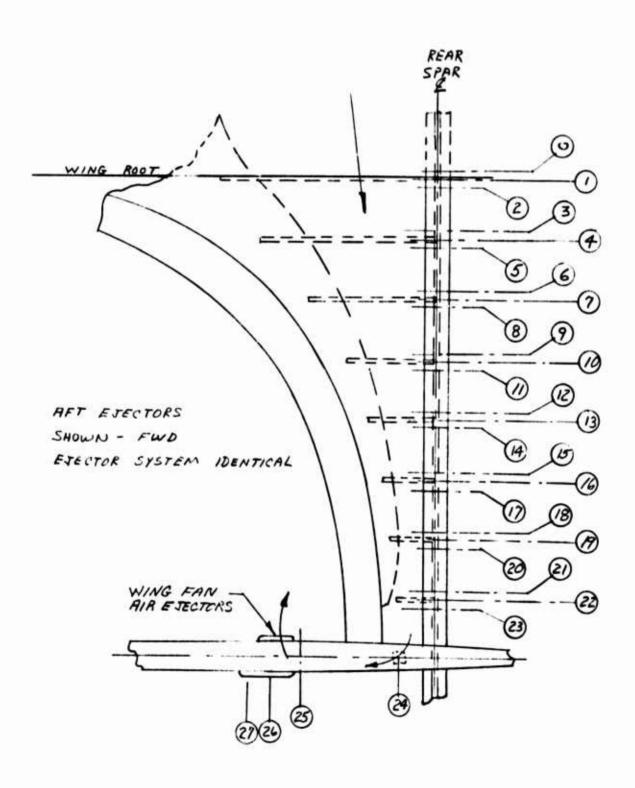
Cooling Air Duct Definition - Center Fuselage to Wing Fan Air Ejectors
